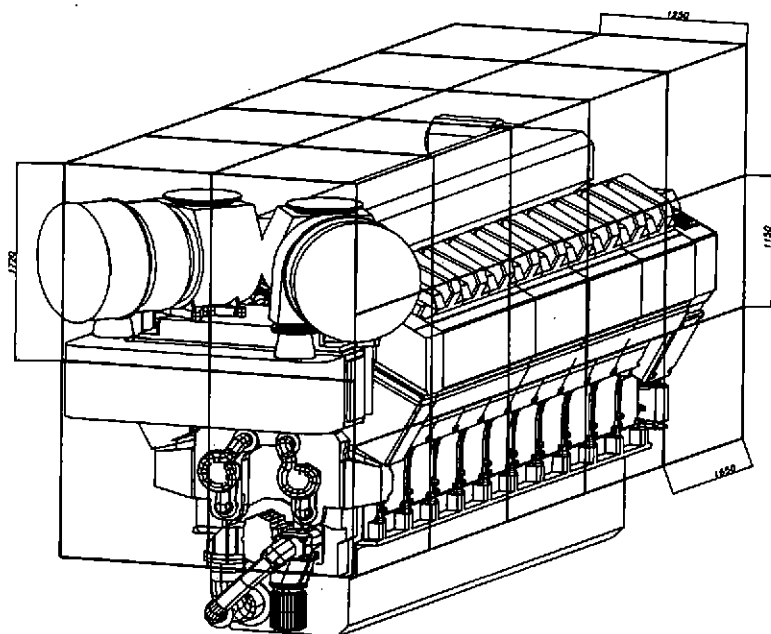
The diesel engine and the partial measurement surfaces used in the ISO 9614-2 measurements.
